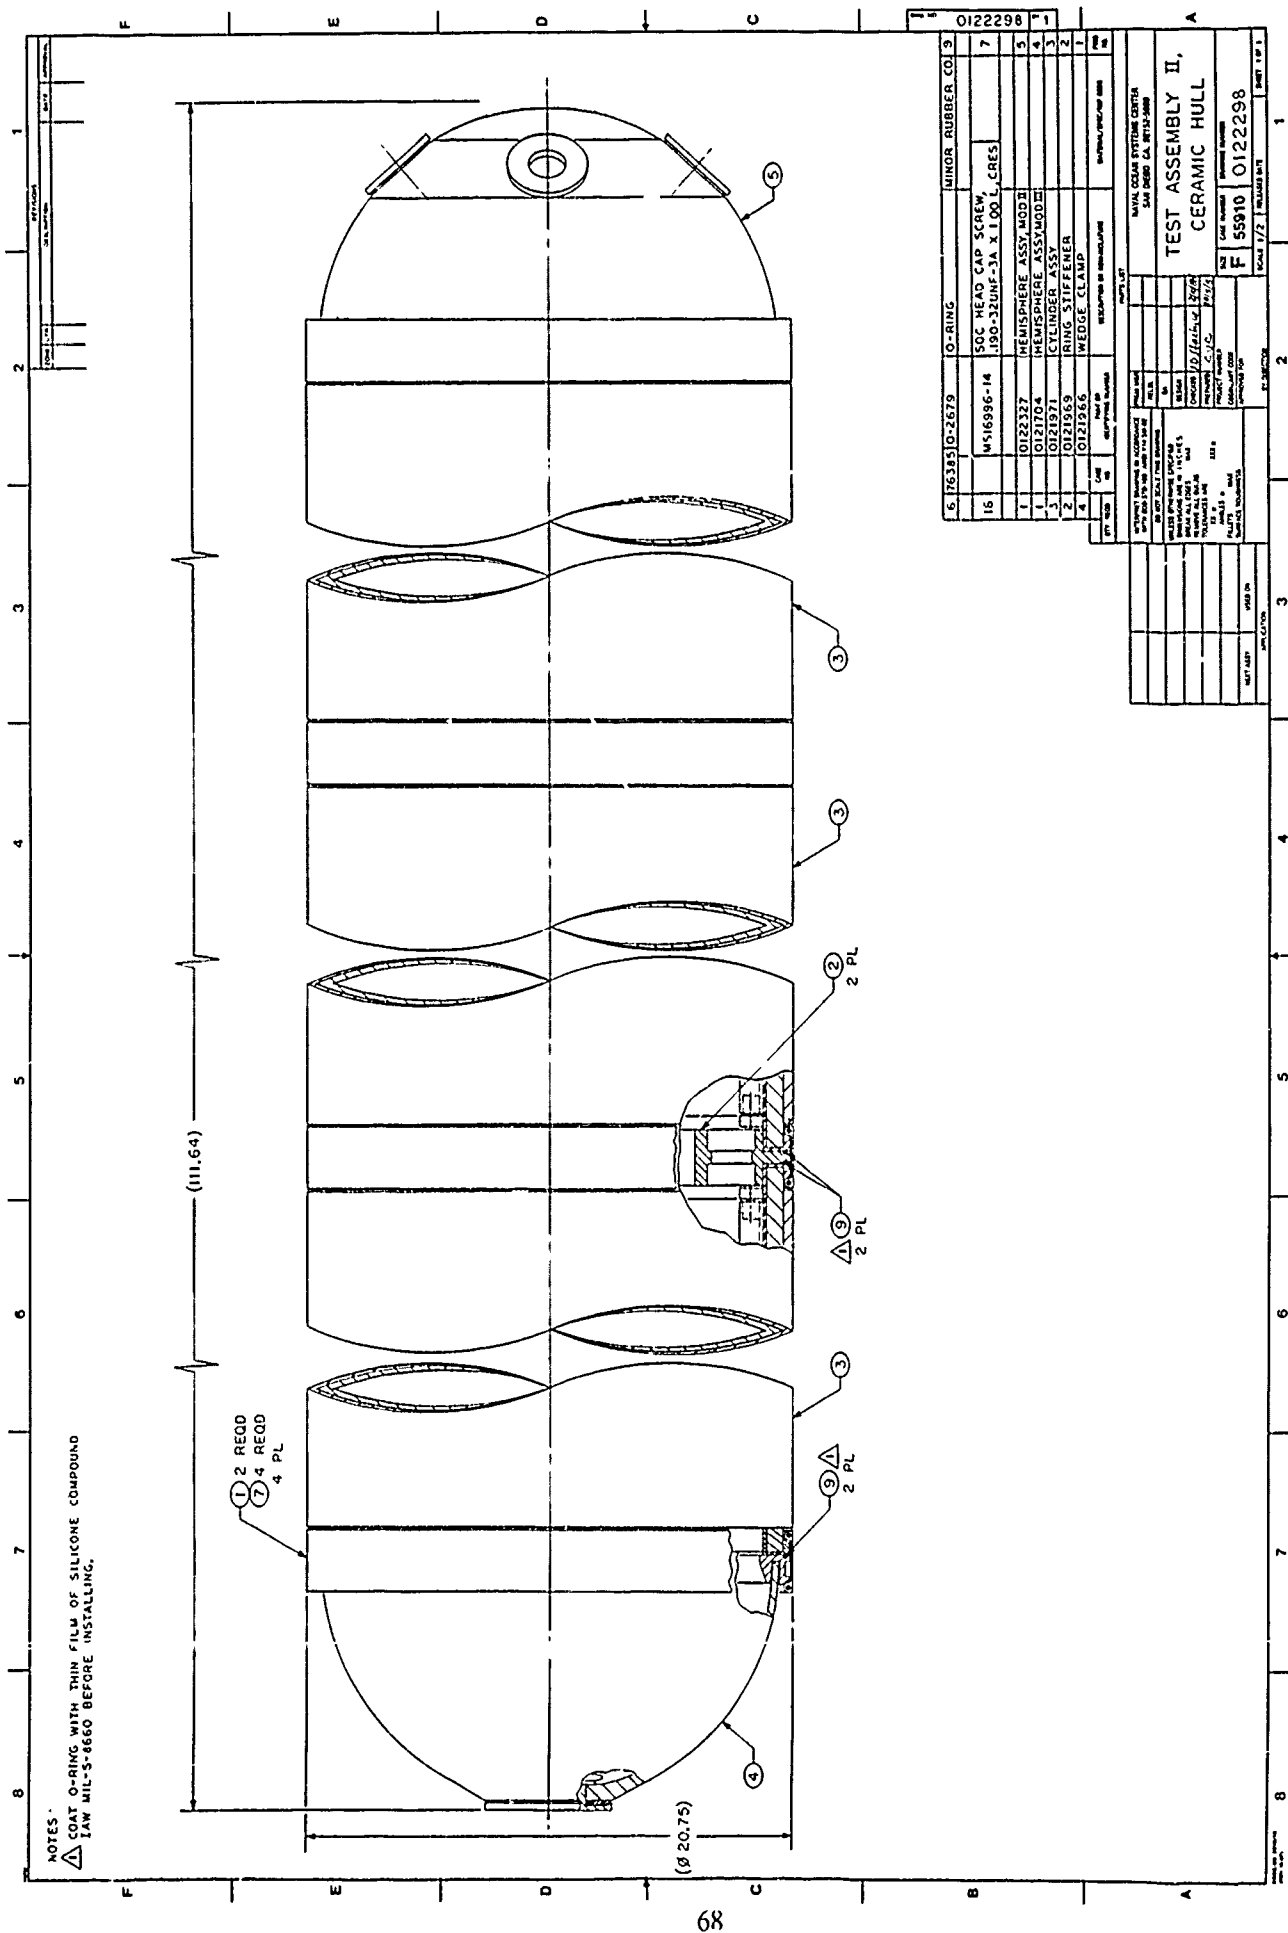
List of components comprising the long (Mod II) housing test assembly made up of two cylinders, joint stiffener, and two hemispheres.
